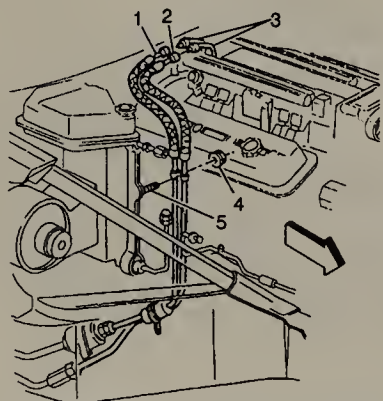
Unfasten the fuel line nut (4) from the evaporator and blower module stud (5)
